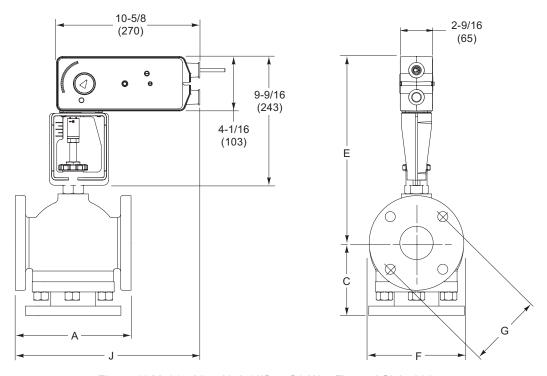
Mx61-720x with 2-1/2" to 4" 3-Way Flanged Globe Valve.
